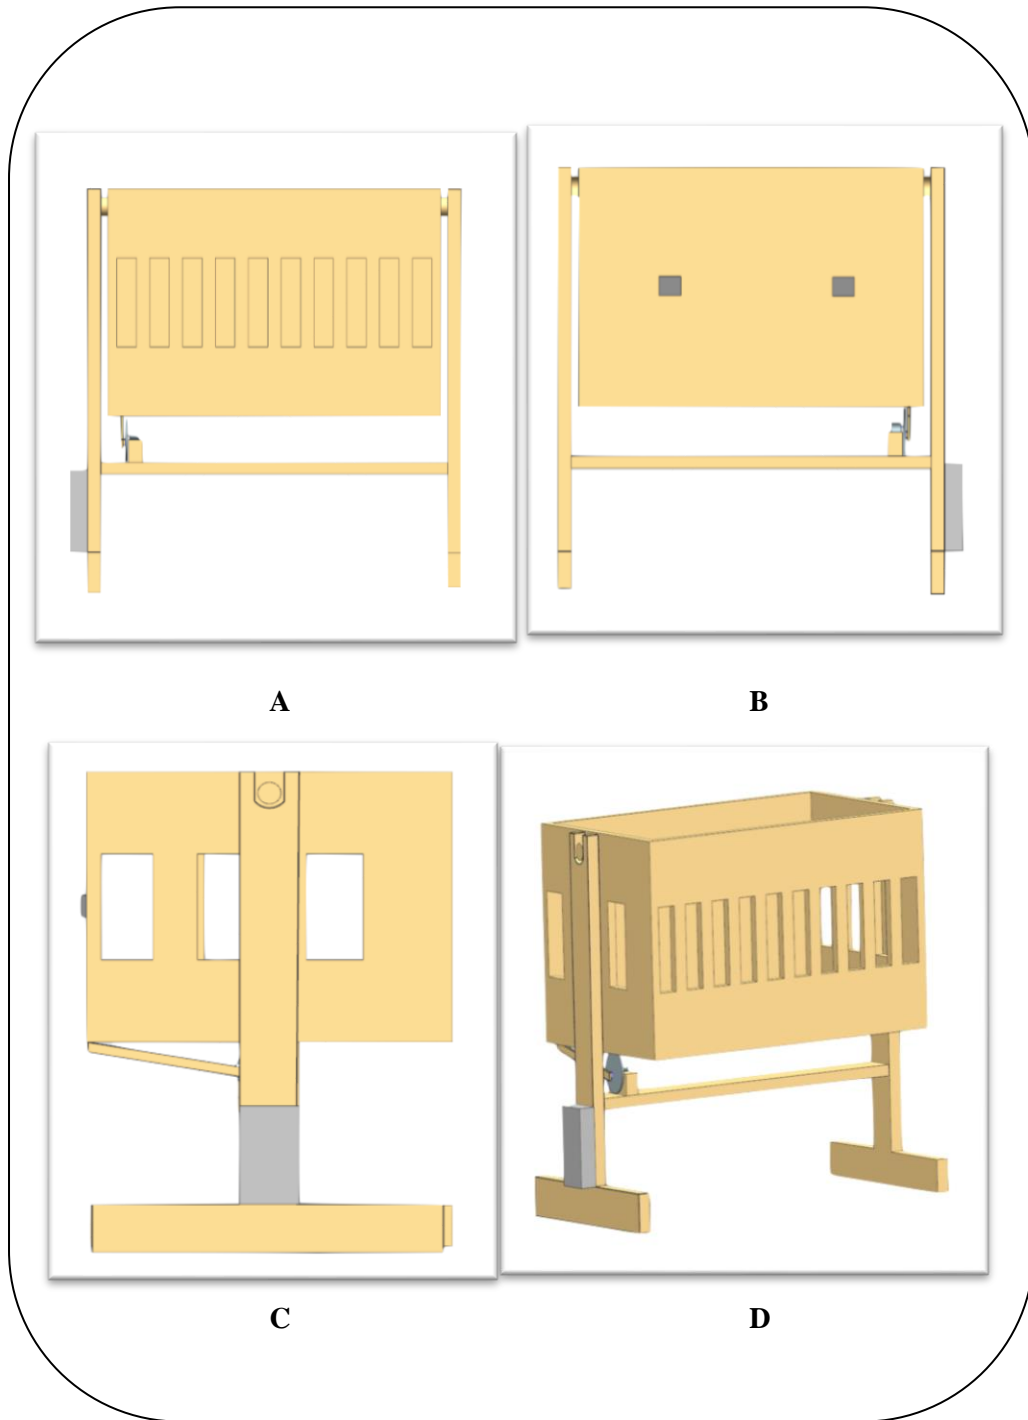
Finished design A: Front view, B: Back view, C: Side view, D: Isometric view
